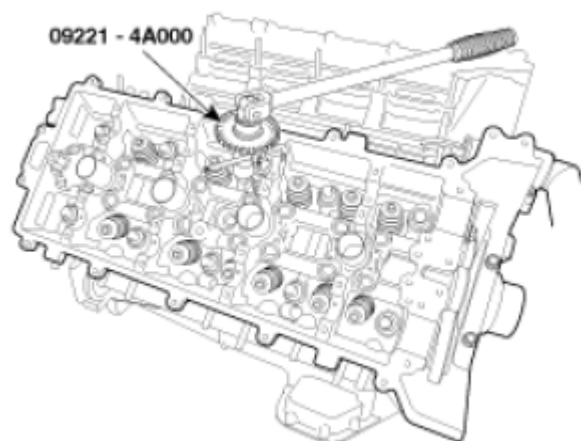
Tightening Cylinder Plate Washers Using SST(09221-4A000)
